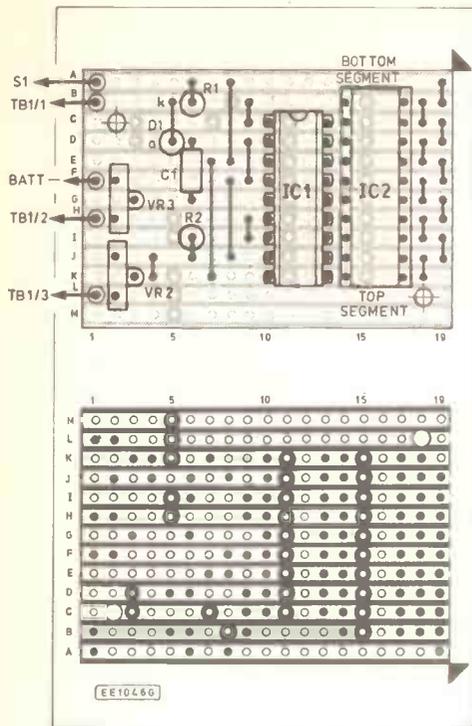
(left). Circuit board component layout and details of breaks to be made in the underside copper tracks. The integrated circuits IC1 and IC2 should be mounted in i.c. holders.
